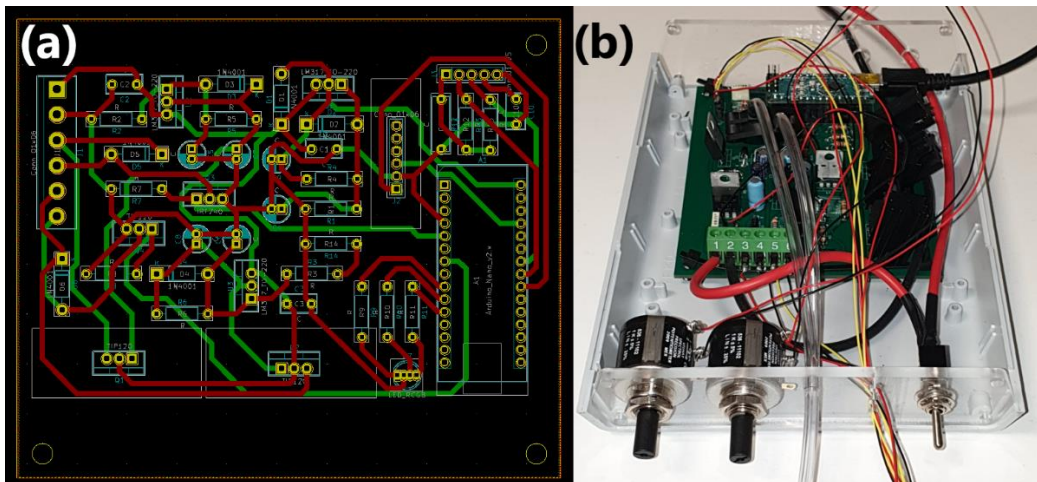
a) PCB board layout designed with KiCad. b) PCB board assembled and mounted inside a plastic enclosure.
